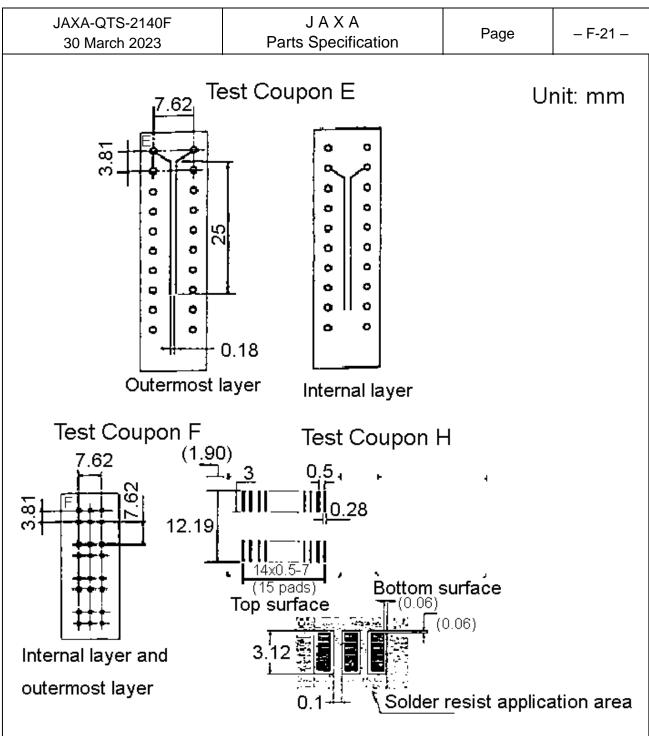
Test Coupons (for Single-Sided or Double-Sided Printed Wiring Board) Arrangement of Test Coupons
